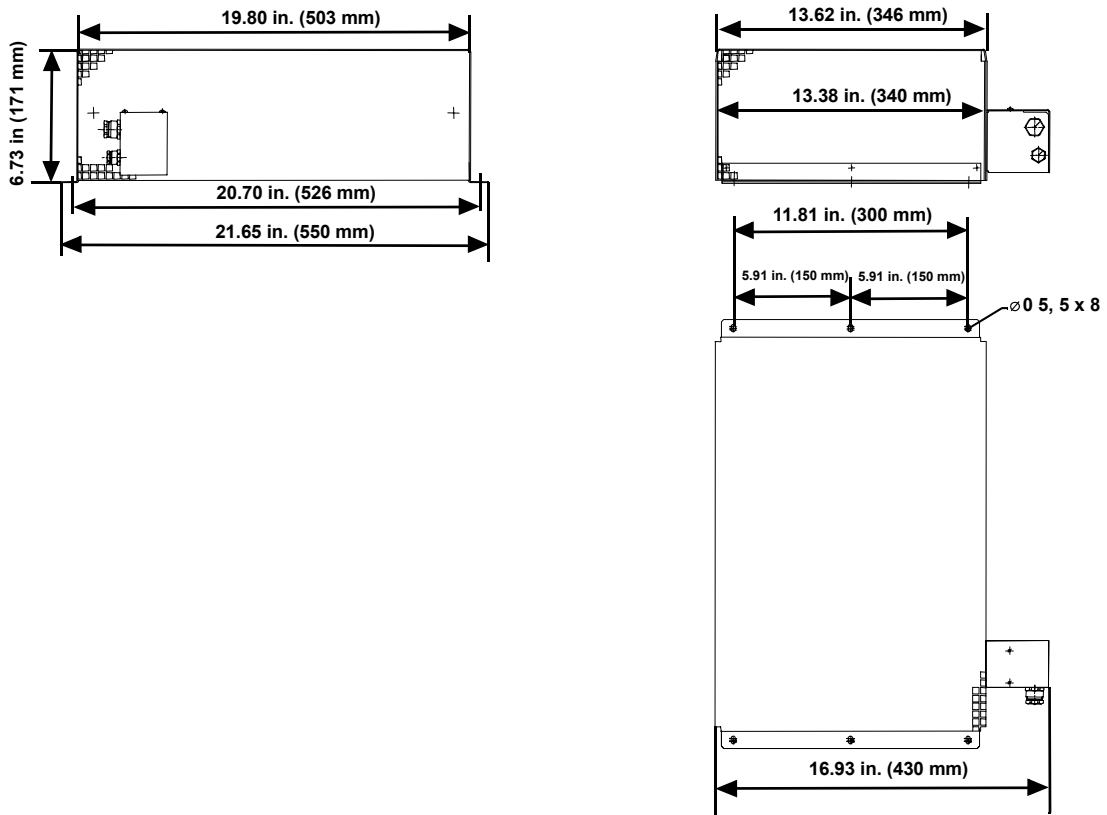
Mounting Dimensions for 460V External Shunt (P/N M.1302.7061)
